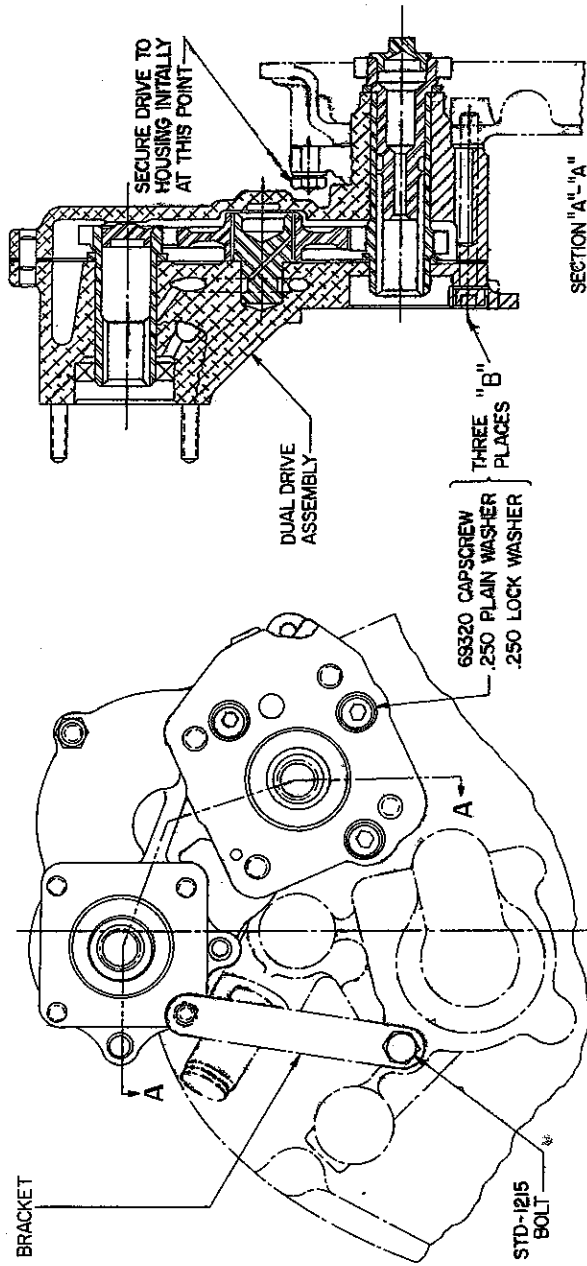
Dual Drive Assembly - Vacuum Pump and Propeller Governor
